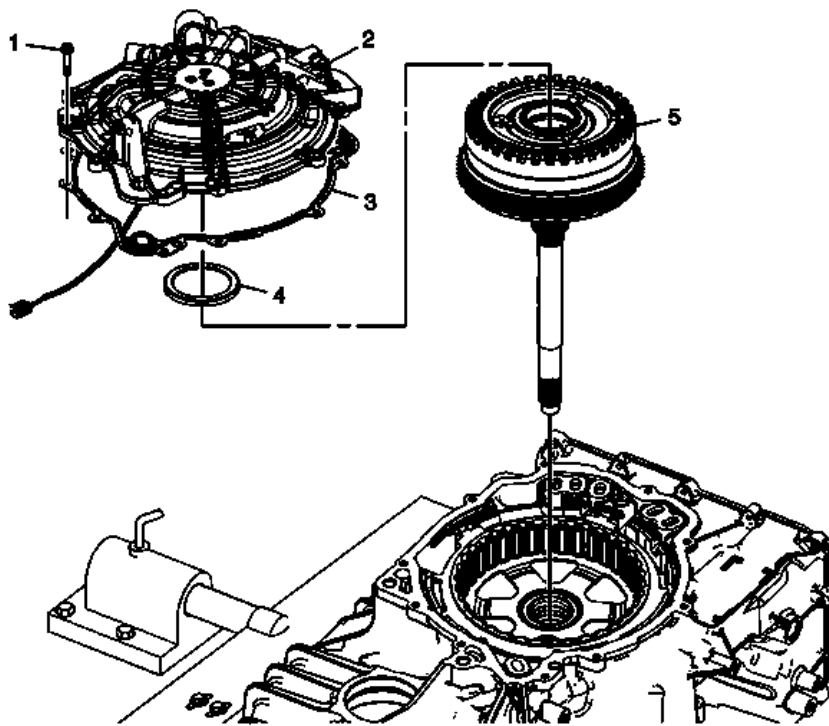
Identifying Case Cover, 3-5-Reverse & 4-5-6 Clutch Housing
